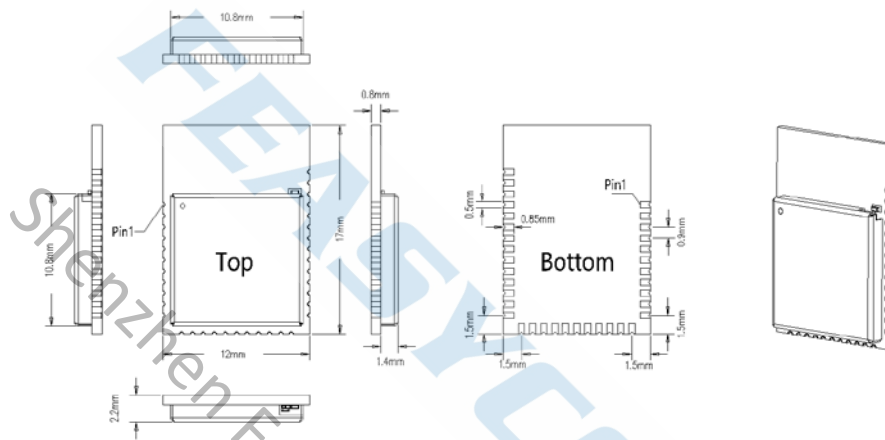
FSC-BT5003RV package dimensions diagram
